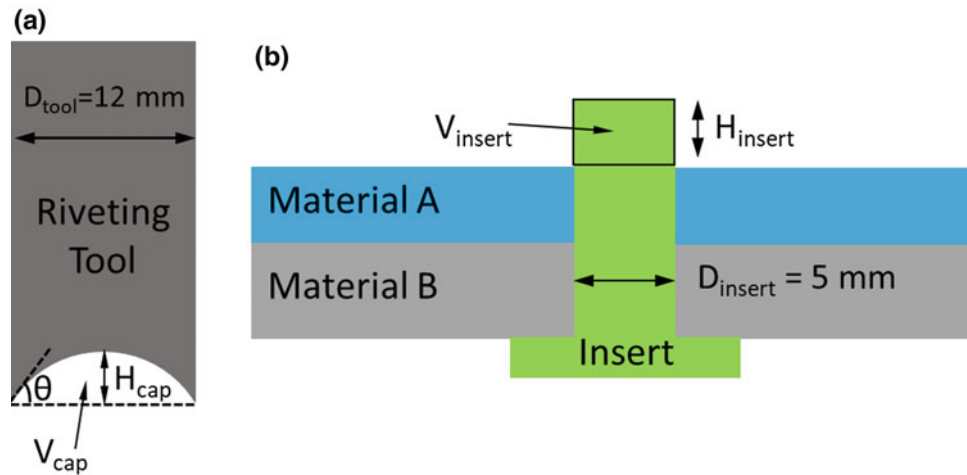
Schematic of volume calculation of the a tool dimensions and b insert dimensions
